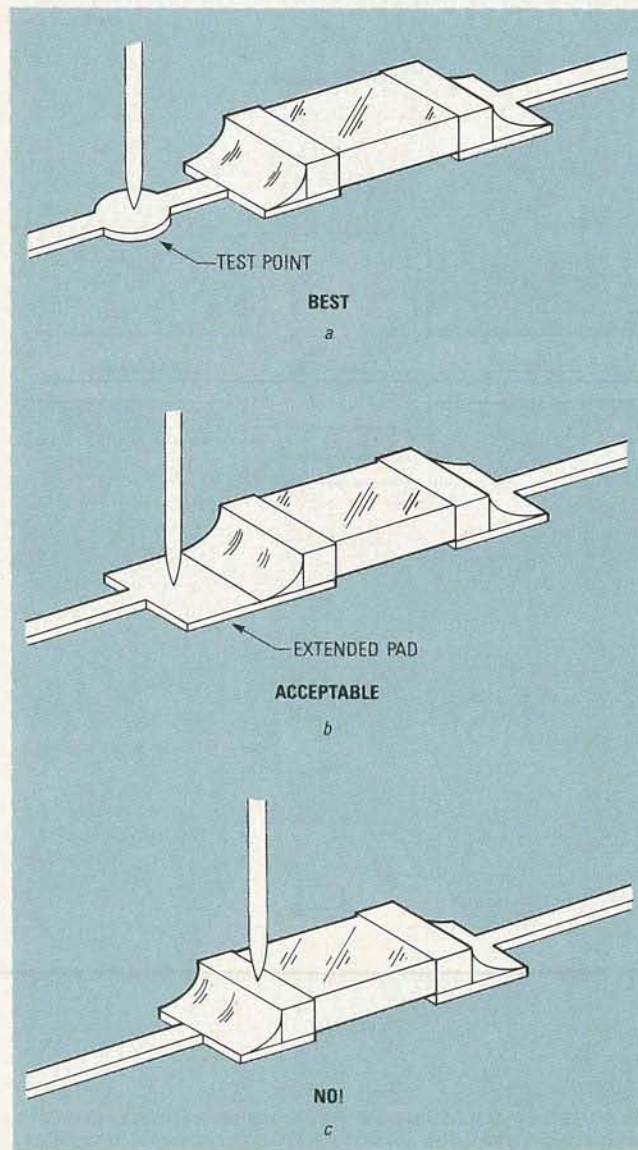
HOW TO USE A TEST PROBE ON AN SMC. The test probe can touch any part of the board's traces or pads, but not the chip itself.
